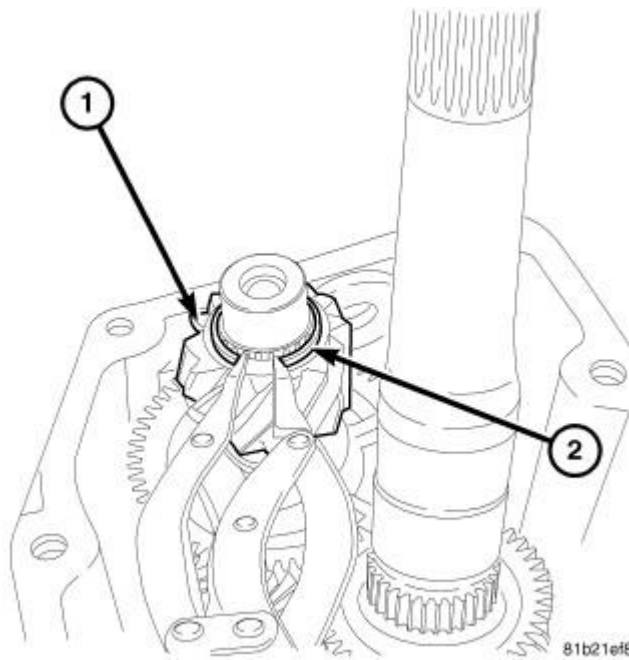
REVERSE COUNTERSHAFT SNAP RING
